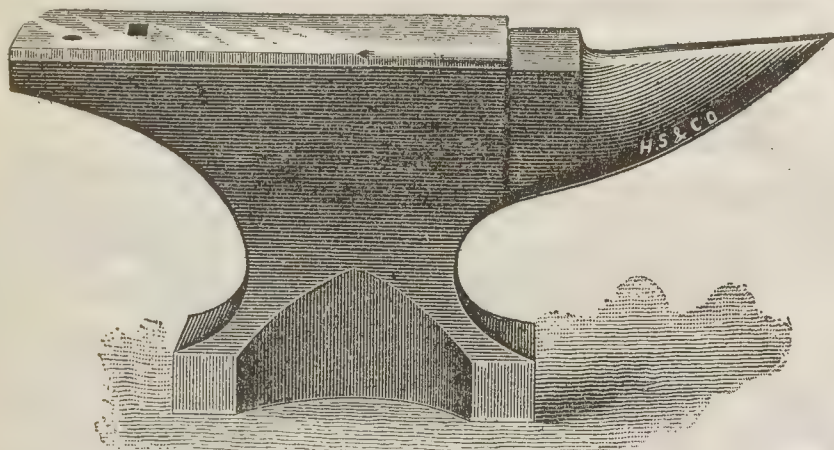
,894.—Typical blacksmith's anvil with first class construction, it is made of best wrought iron and faced with best crucible cast steel. Top and bottom are each one solid piece and welded at waist.
